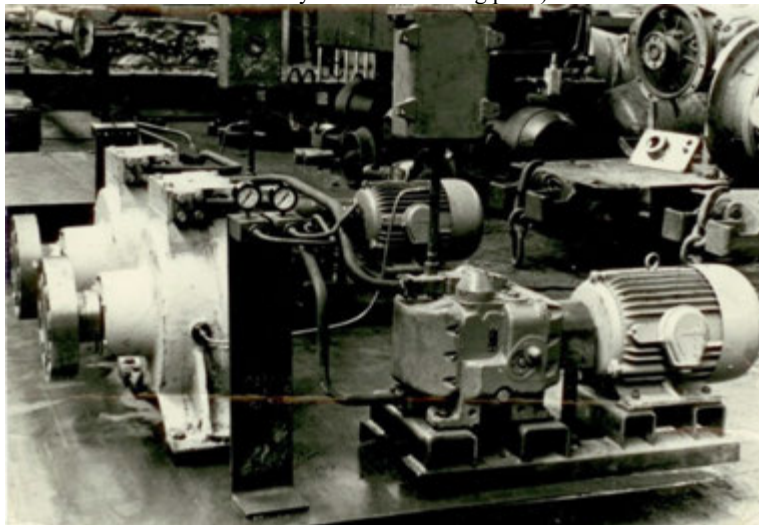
Separate regulated volumetric hydraulic drive of the travel mechanism of the bridge crane with a capacity of 15/3 t. with a high-torque engine, Uzlovsky machine-building plant (machinery on the line of readiness).
